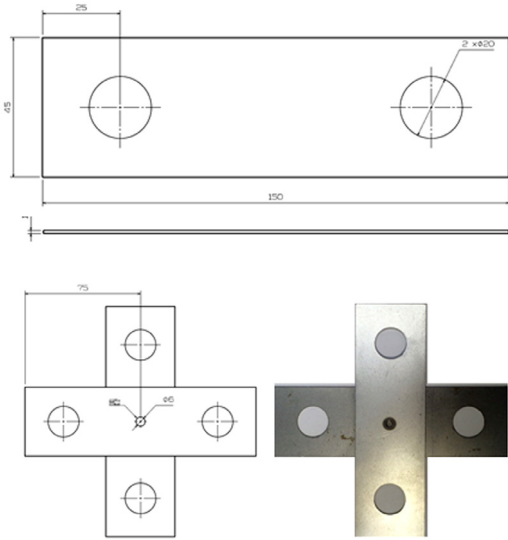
Normal tension specimen for spot and plug welding
